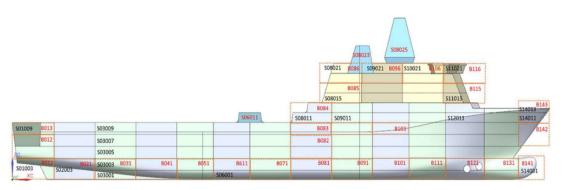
SimPlan Ship – Labels of Block and Section Divisions (SimPlan AG)
